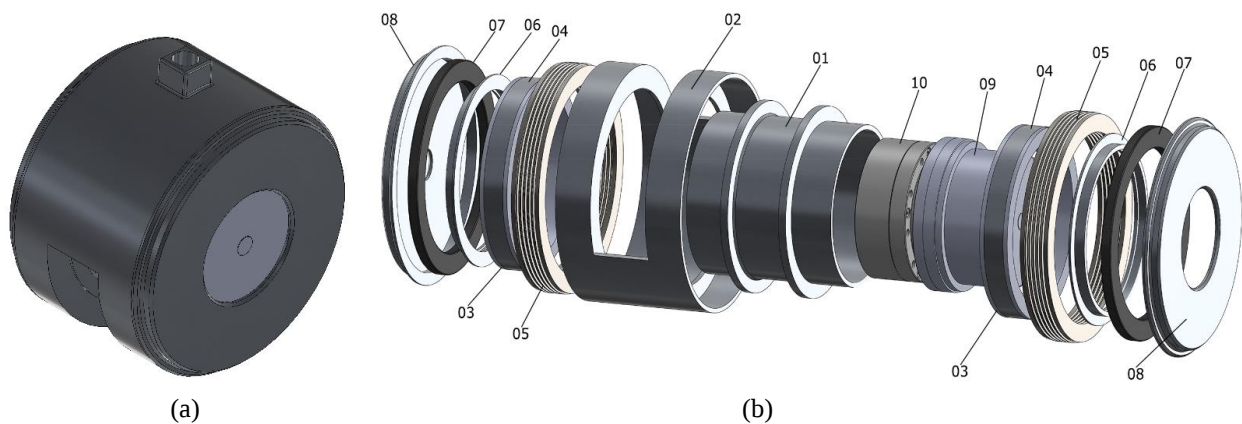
Actuator's 3D view. (a) Final assembly of the actuator. (b) Exploded view
